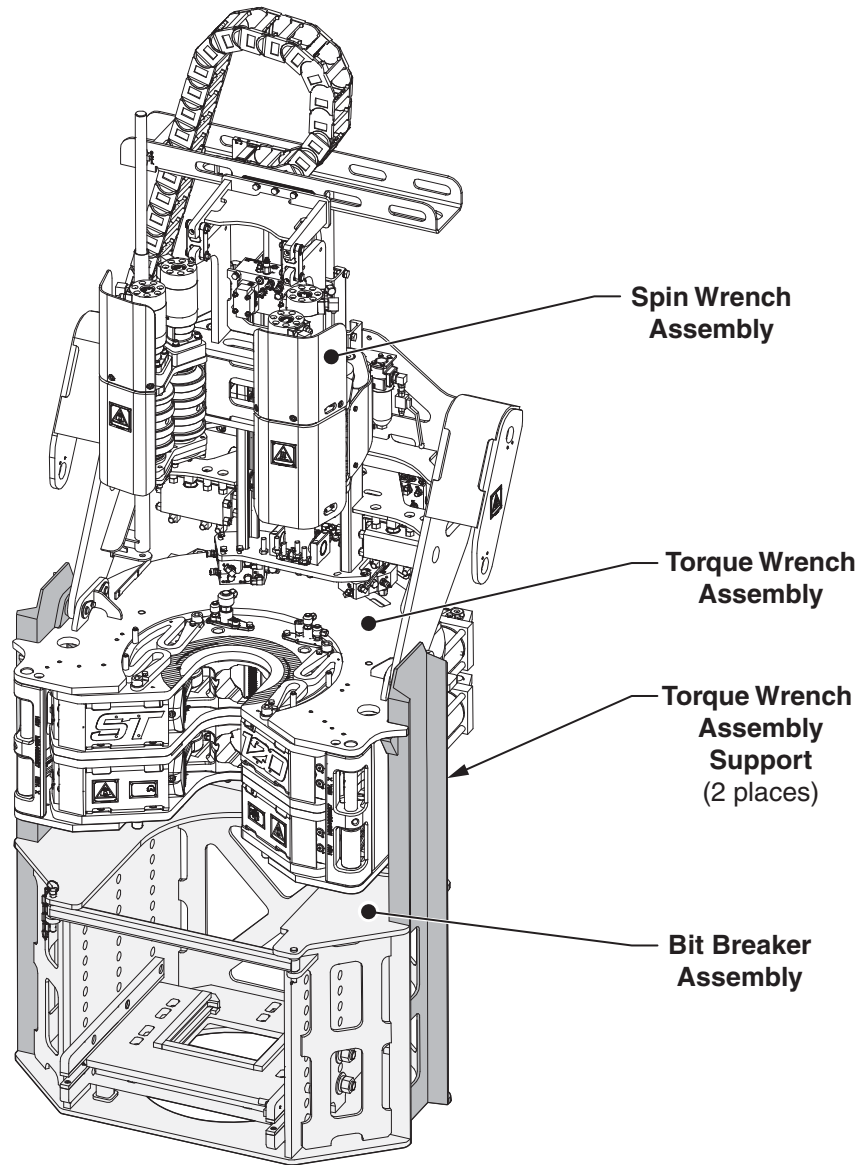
Torque Wrench Assembly Interface with Bit Breaker Assembly (2 of 2)
